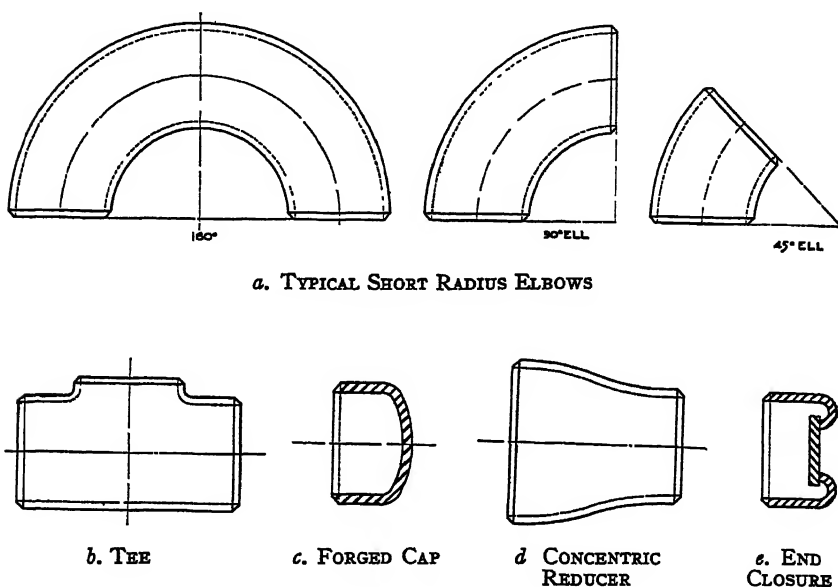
TYPICAL WELDING FITTINGS
